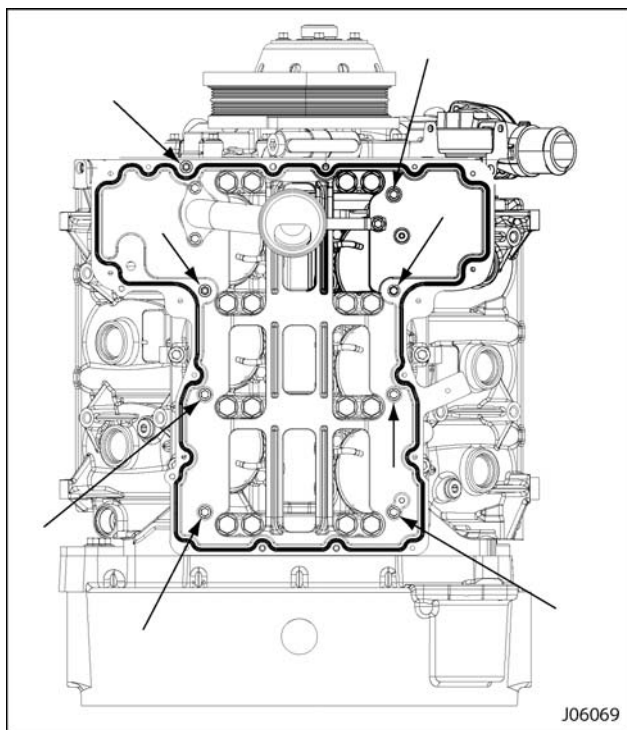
Upper oil pan mounting bolts (stripped chassis)
